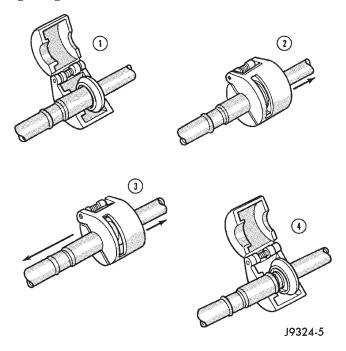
Refrigerant Line Spring-Lock Coupler Disconnect
